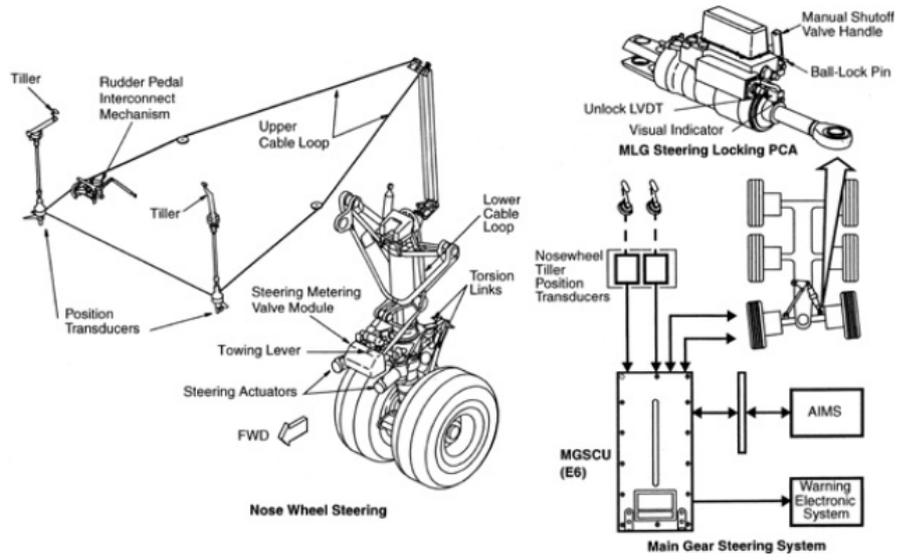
Nose wheel and main gear steering (Boeing Aerospace Co.) [17]
